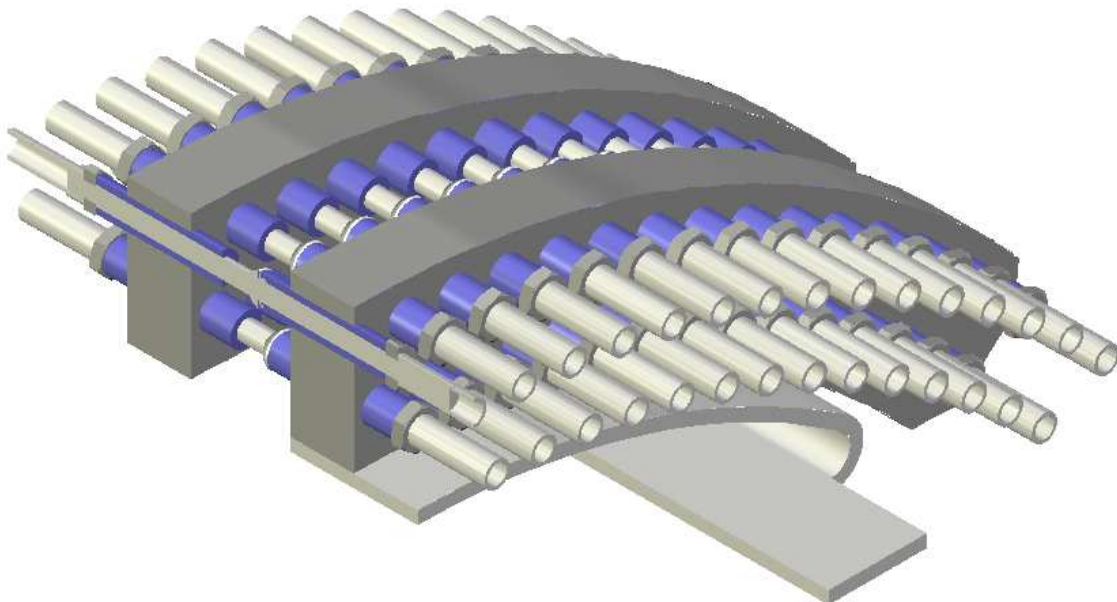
Technical drawing of electrical connectors. 52 steep pins are pressed on an equal number of spring loaded pins.
